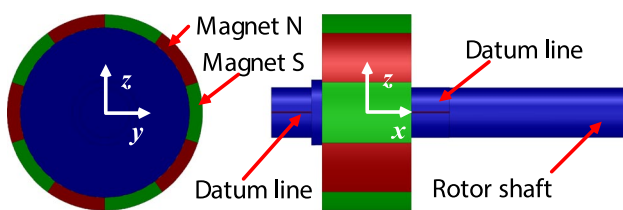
Rotor structure with datum line on rotor shaft
